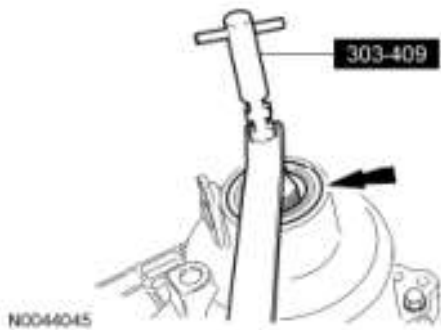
Removing Rear Output Shaft Seal Using Oil Seal Remover
